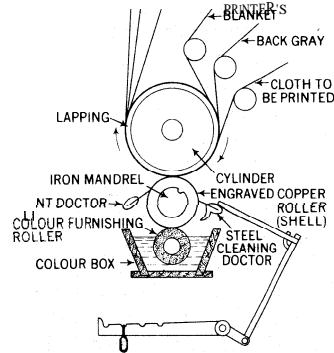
WORKING PARTS OF A ONE-COLOUR TEXTILE PRINTING MACHINE
